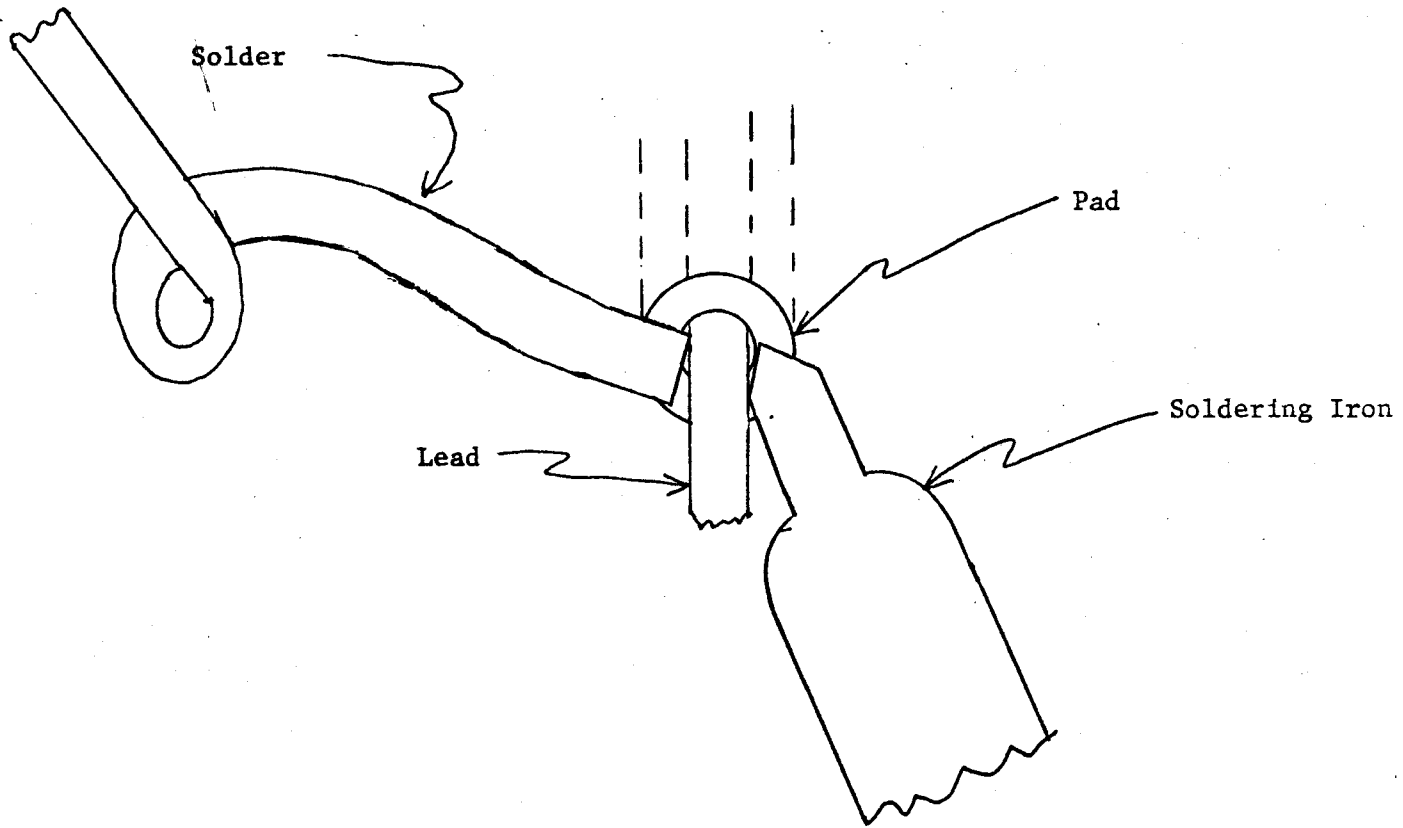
Solding Technique-apply solder to opposite side of lead from the soldering iron
